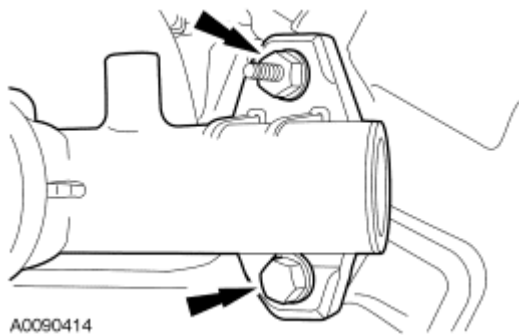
Locating Coolant Bypass Tube Bolt & Nut
